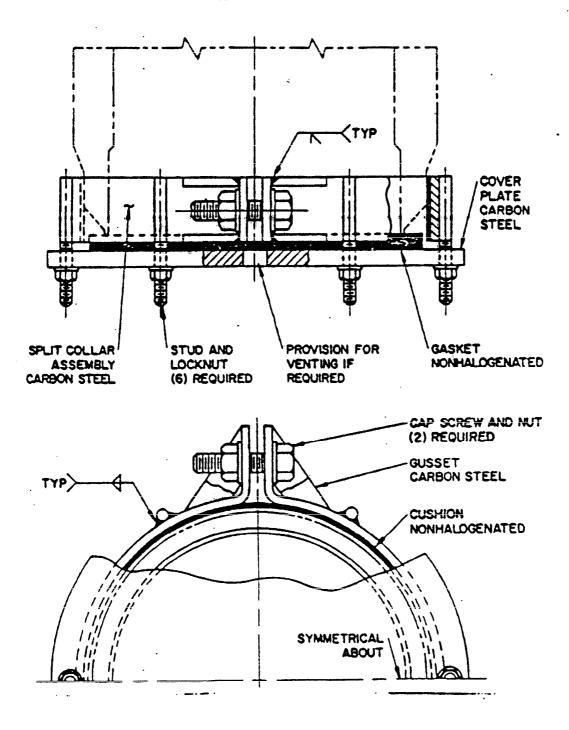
Schematic drawing for shipping cap 6 inches or larger.
